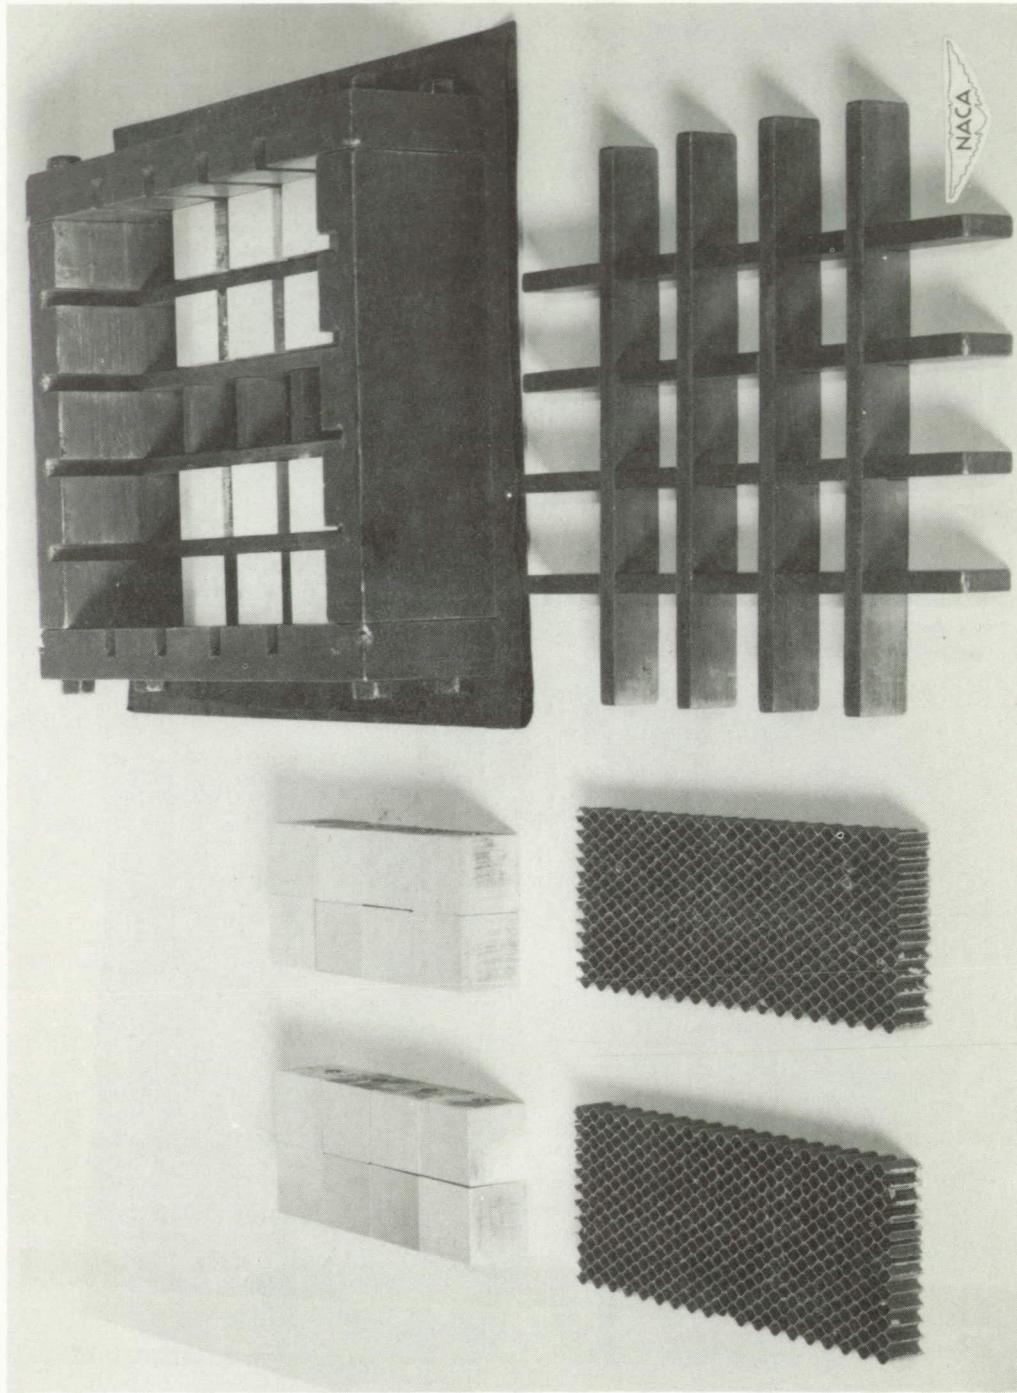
Alignment jig used in fabrication of 25 or less flatwise tension specimens.
